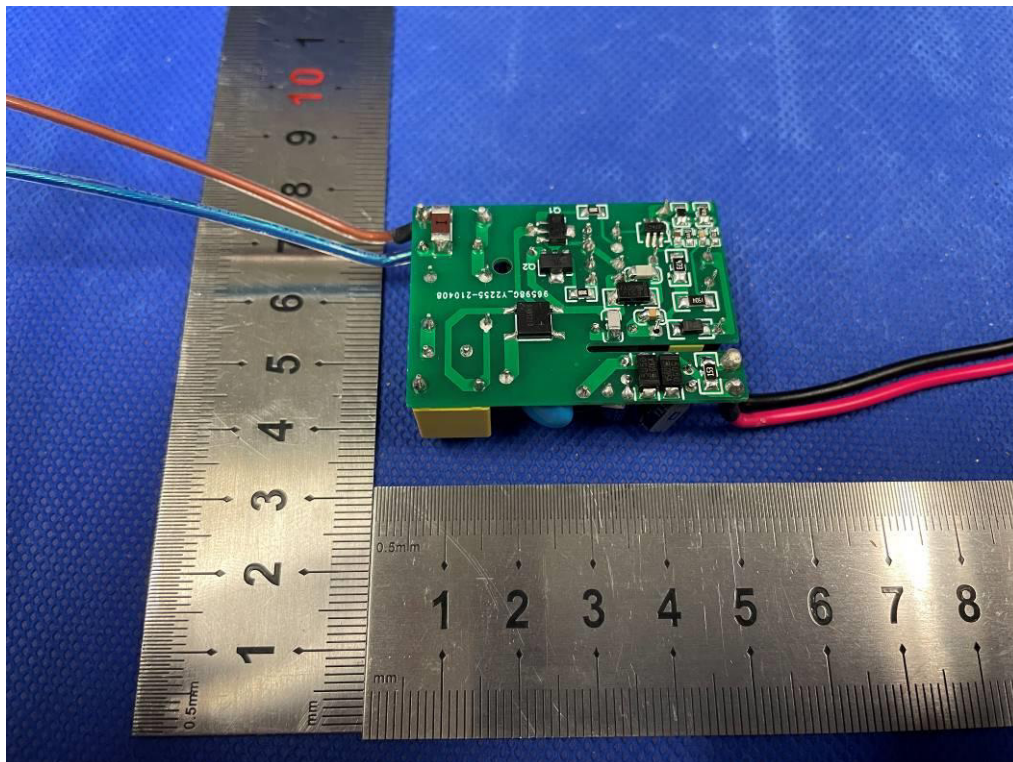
Bottom view of driver PCB for model MINI-10-zzz
